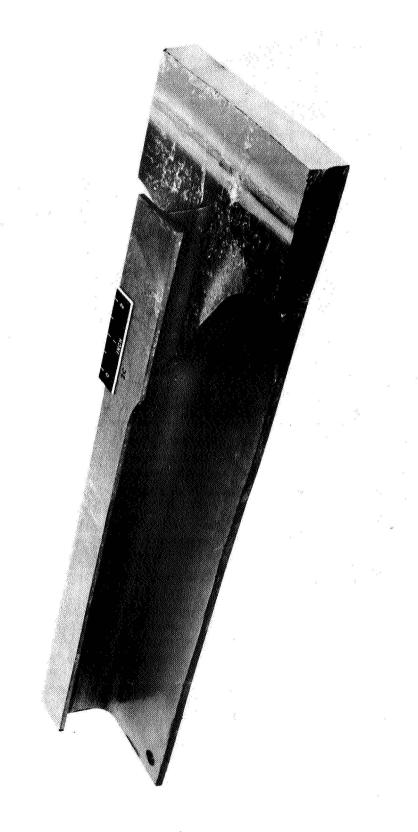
Welded Configuration Section 0.87 Inch Thick Weld, Conversion Coated, Welded, and Received's Touch-up Treatment During a Saturn Fuel Tank Processing - 24 Hours Salt Spray
